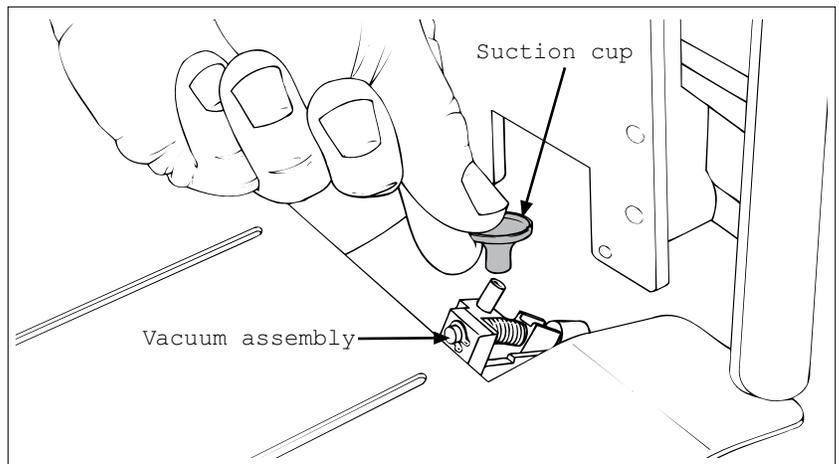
Removing Suction Cup from Vacuum Assembly
